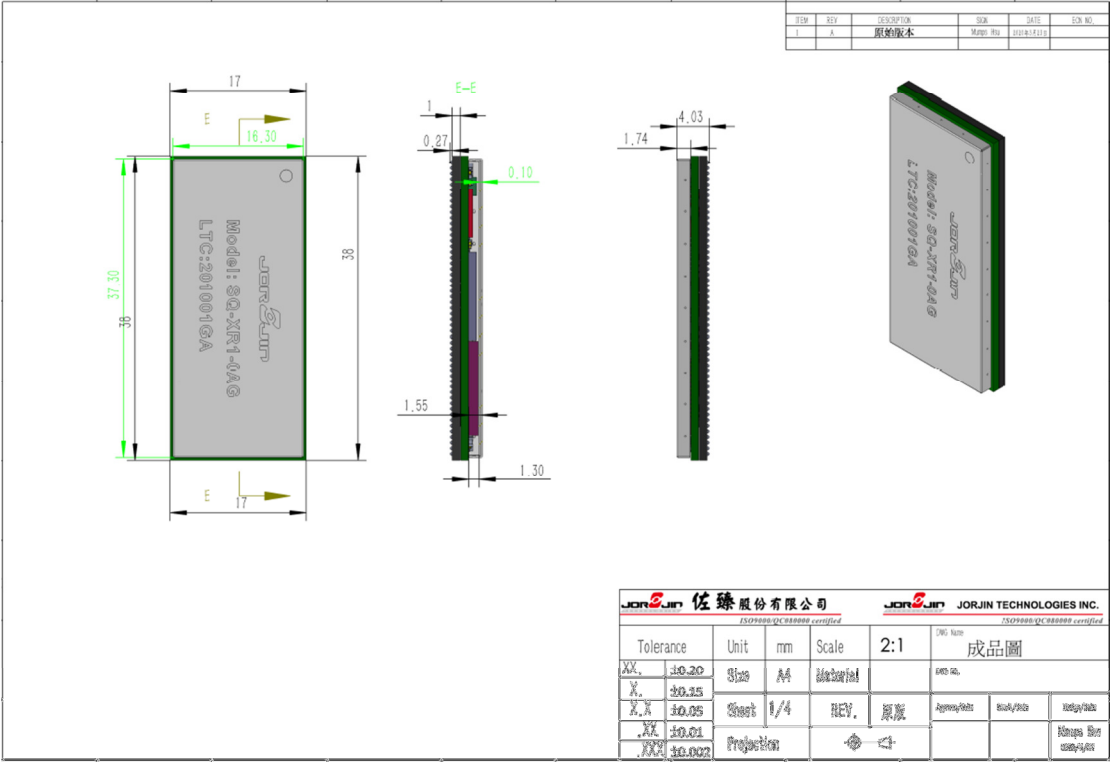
SOM Outline Dimension 38mmx17mm(+/-0.15mm)
